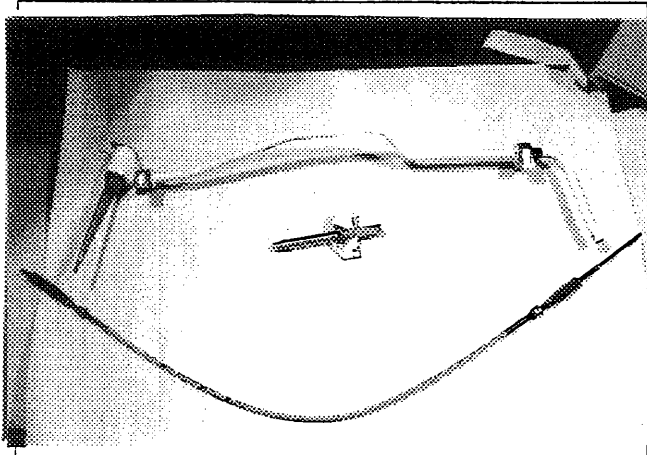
FRONT ADJUSTABLE STABILIZER ASSEMBLY
